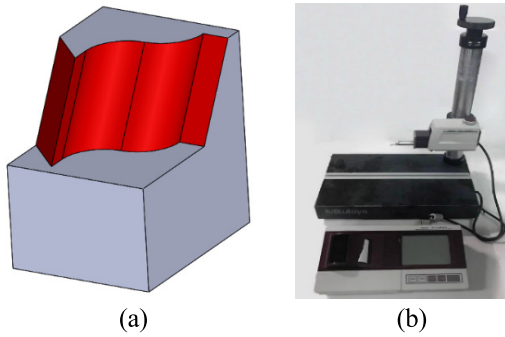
Experimental results of the IMS, (a) CAD drawing for the machining workpiece; (b) Surface roughness tester (SJ-400).
